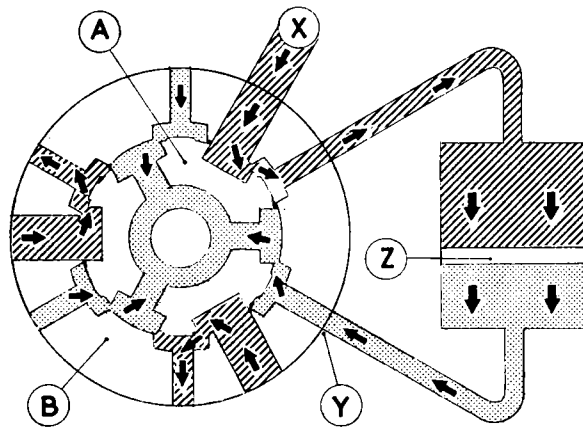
Operating diagram of the rotor valve (steering turned)
